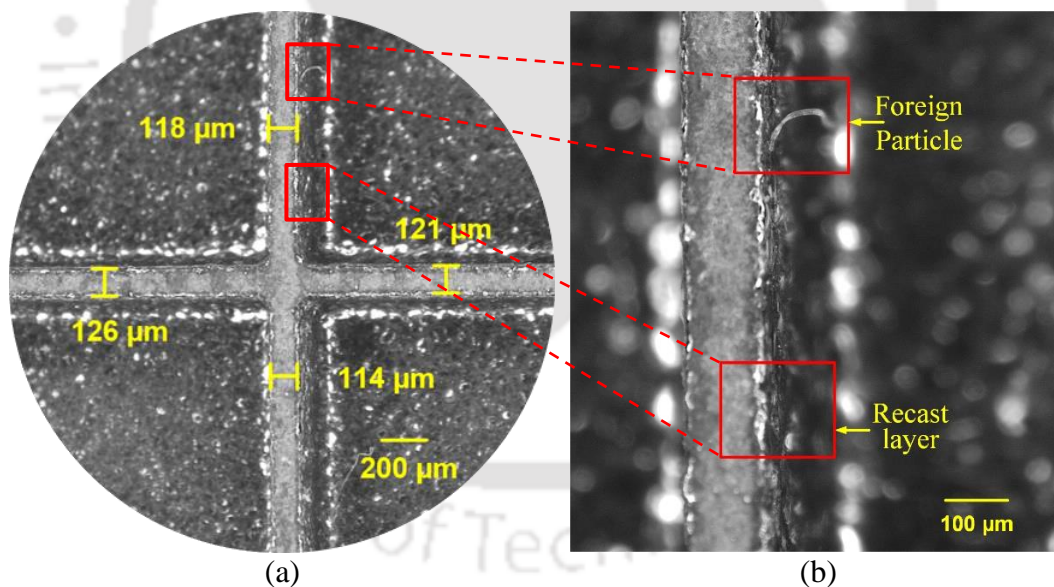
Optical microscopic views of (a) cruciform-shaped thin gimbal flexure fabricated by EDM and (b) surface defects
